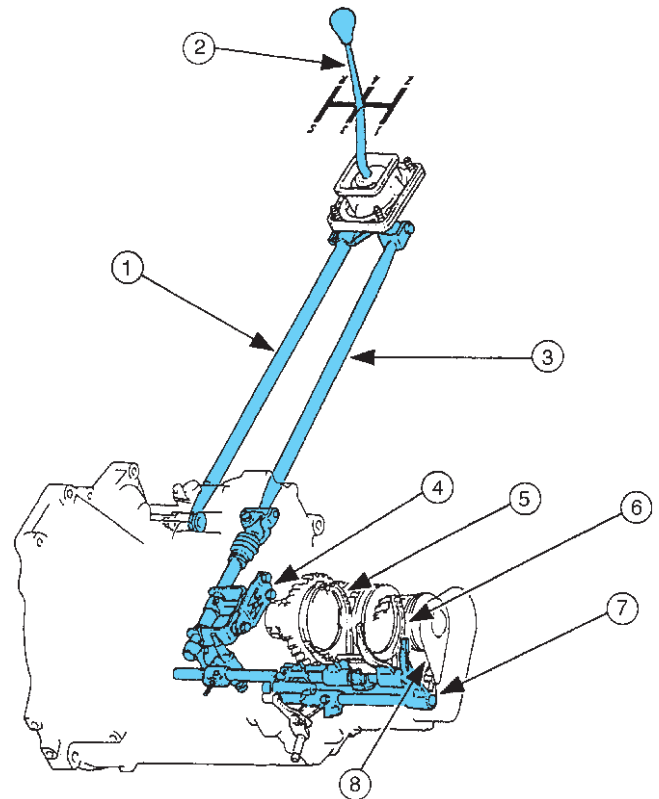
This shift linkage uses a stabilizer (1) to eliminate ill effects from engine motions. The shift rod (3) rotates for selection or moves fore or aft to complete shifting. (Courtesy of Ford Motor Company)
